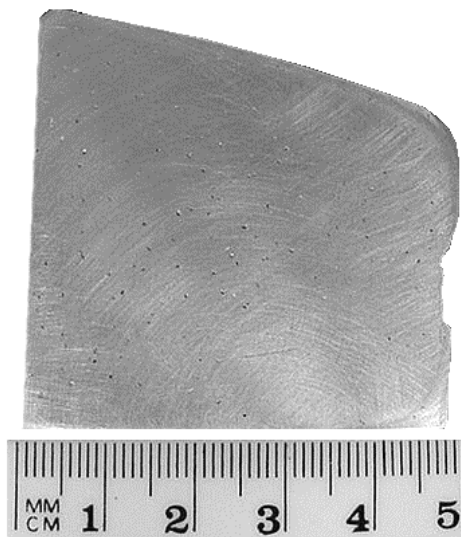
Sample of 319 alloy ingot prepared for Remelt reduced pressure test (RRPT), top view
